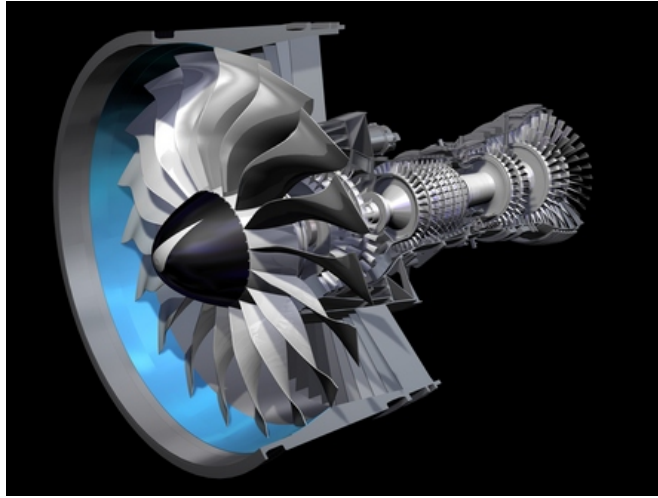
Cutaway of the PW1000G geared turbofan engine
